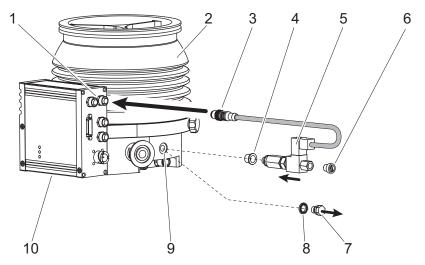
Example: Connecting M8 sealing gas valve to TC 110, TC 120 electronic drive units
